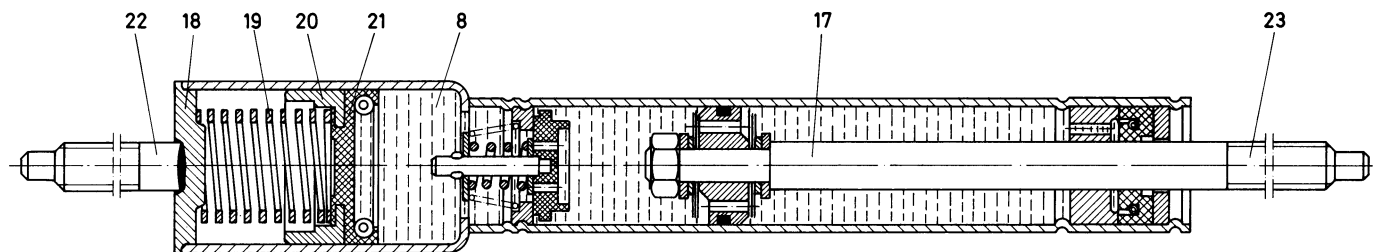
Stabilus compact steering damper with pin-type joints on both sides (position 22 and 23), butt-welded equalization chamber 8 and spring-loaded cup seal 20.
